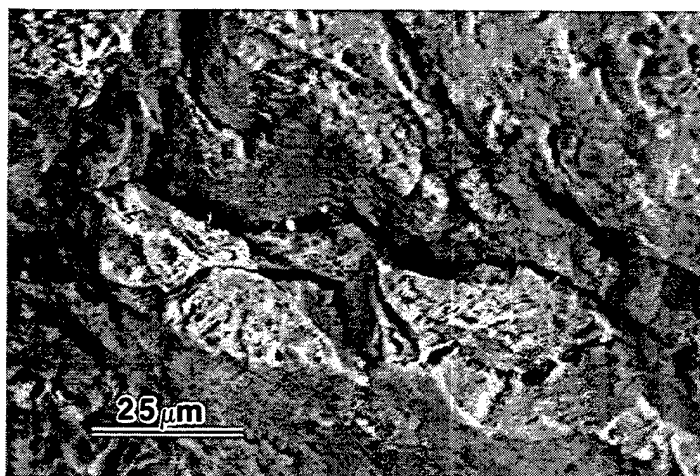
SEM of transgranular cracking on the surface of the fracture with secondary cracking.
